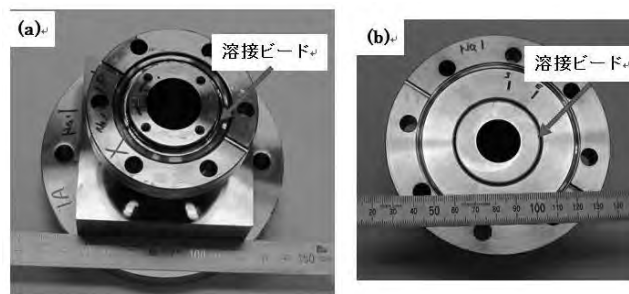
Appearance of the welded part of electromagnet model unit.
